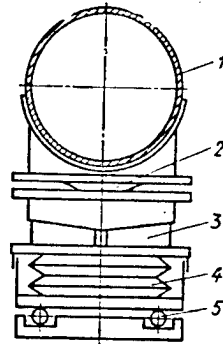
Additional Movable Support: 1--main circulating pipeline; 2--spherical bearing; 3--wedge jack; 4--disk spring; 5--spherical bearing
